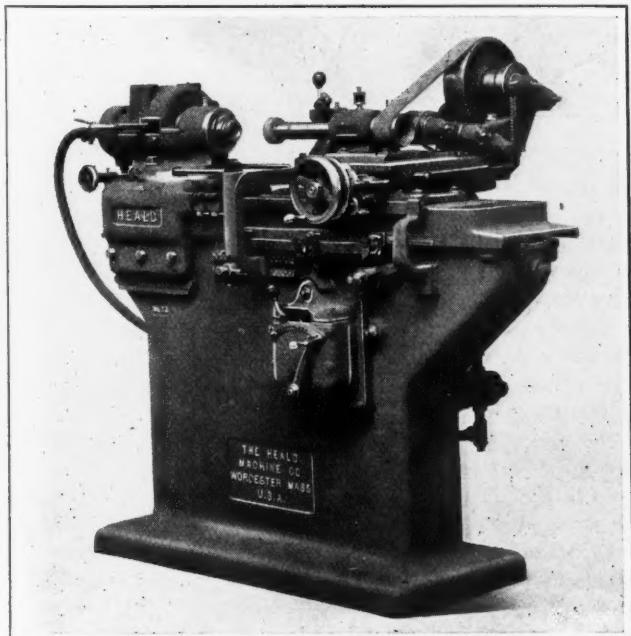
Heald Internal Grinding Machine equipped with Hydraulic Drive for the Table
